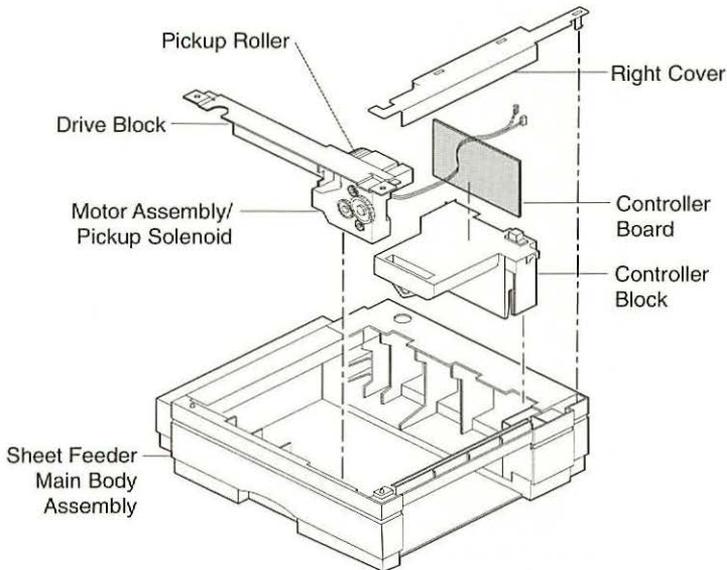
LaserWriter 16/600 PS Sheet Feeder Exploded View
